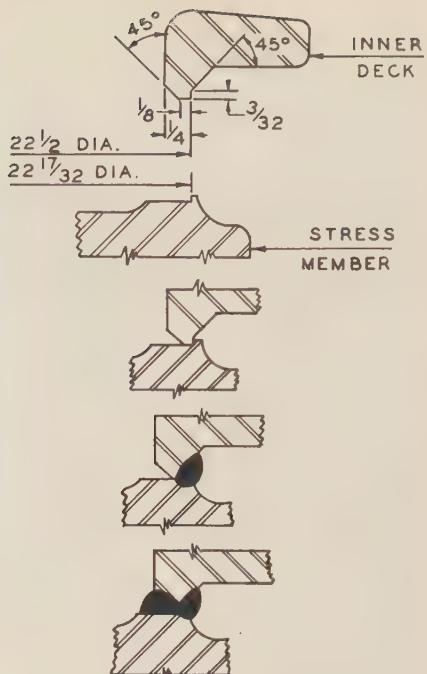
The inner deck sub-assemblies and stress member sub-assemblies are machined to nest together for welding, as shown. The matching faces are chamfered to provide a place for the weld metal. The right-hand channel is first filled in with weld metal. The filling in of the left-hand channel with weld metal completes the welding procedure.
